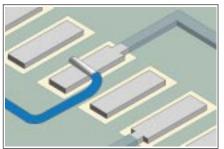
Not Recommended* Wire perpendicular to conductor; contact, SMT pad.
